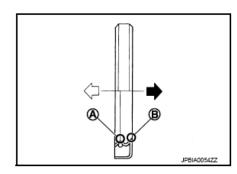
Identifying Installing Position Of Rear Oil Seal
